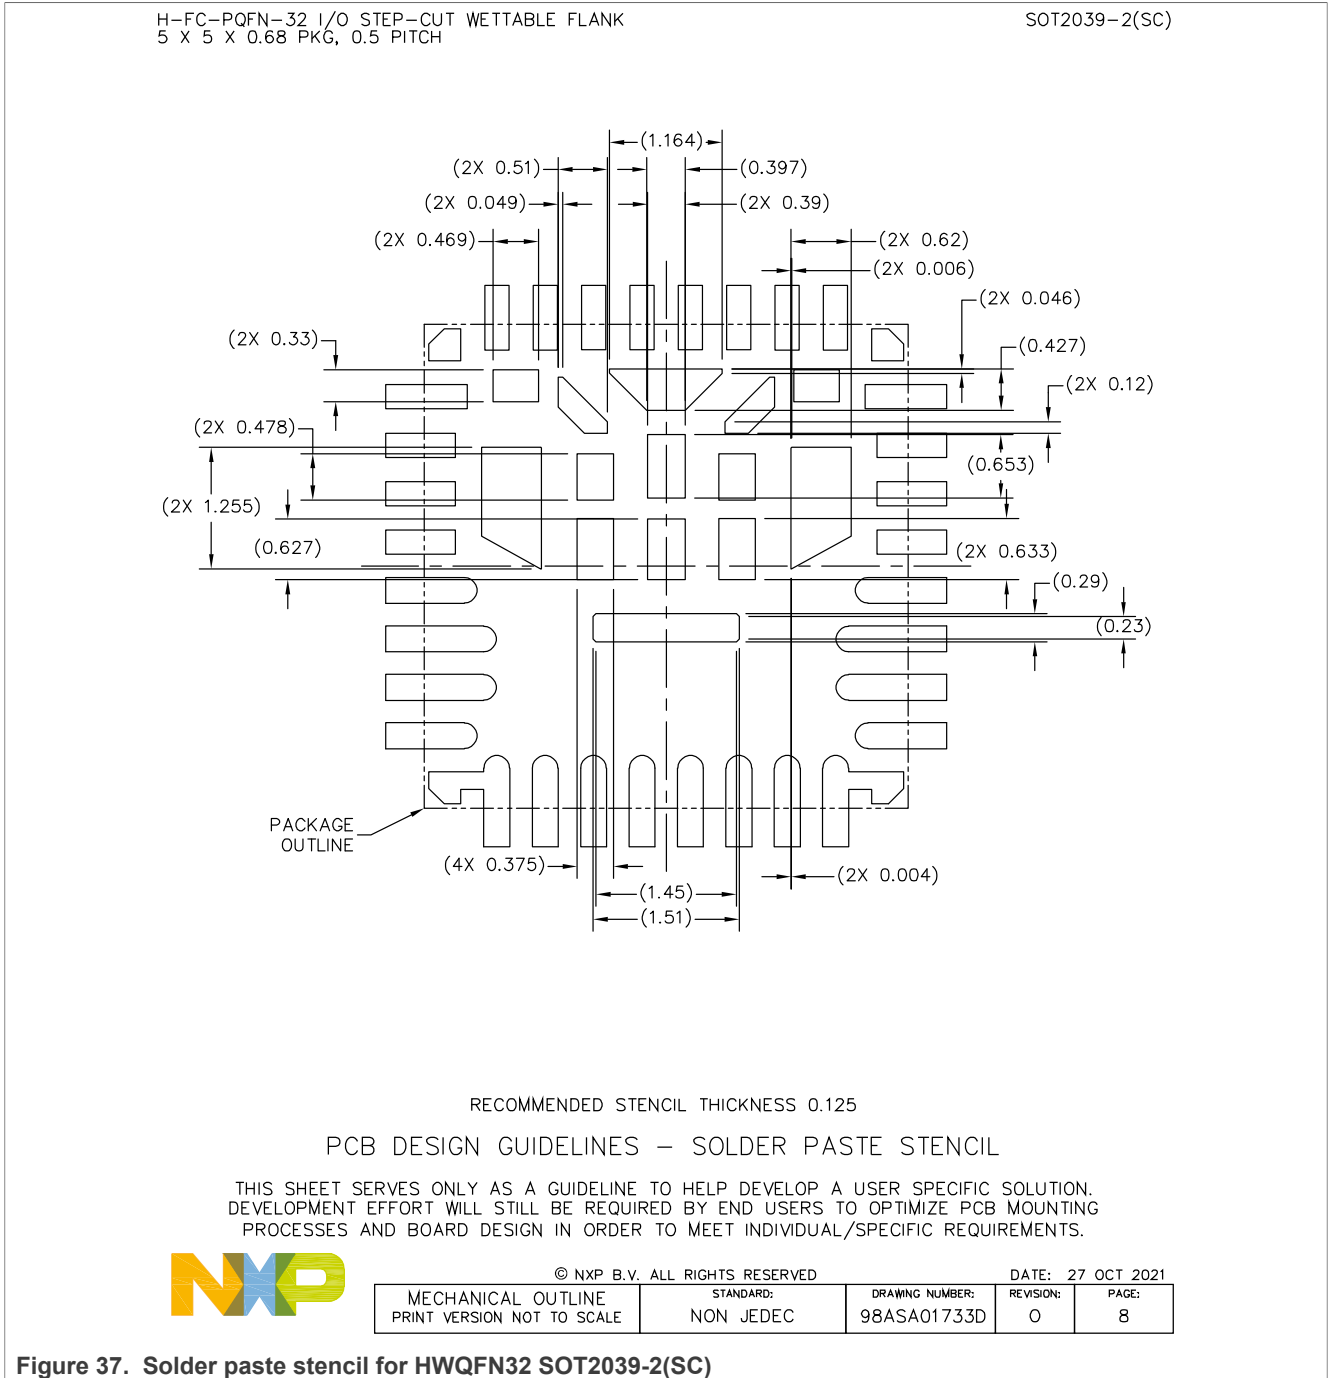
Solder paste stencil for HWQFN32 SOT2039-2(SC)
